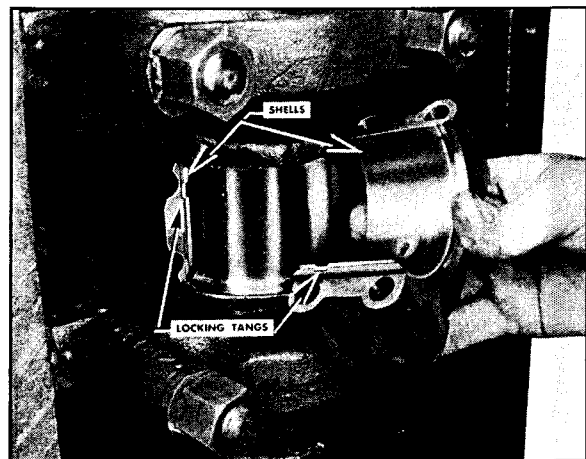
Location of locking tangs and milled recess in rod and cap
